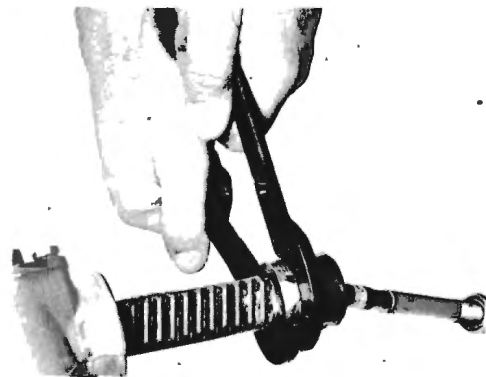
Removing the ball outer seat and locknut (new type joint)
